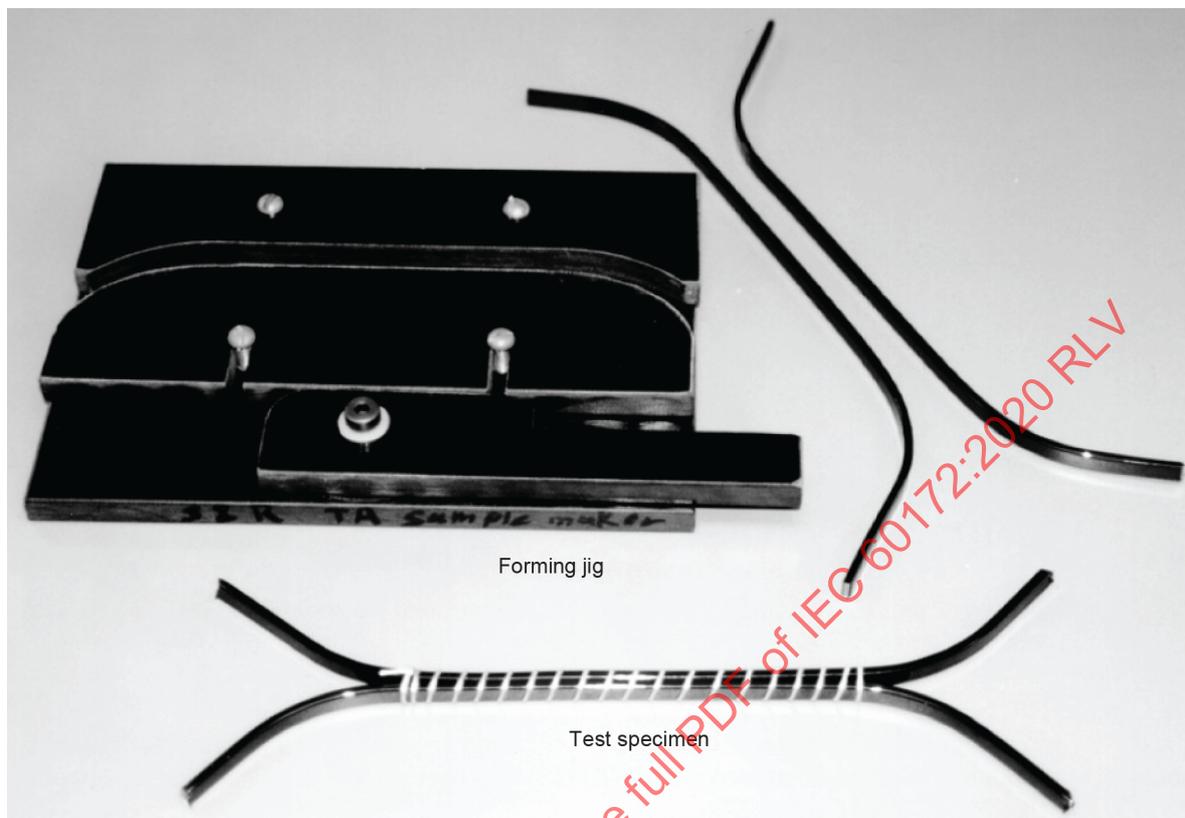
Jig for bending large magnet wire, dielectric test specimen
